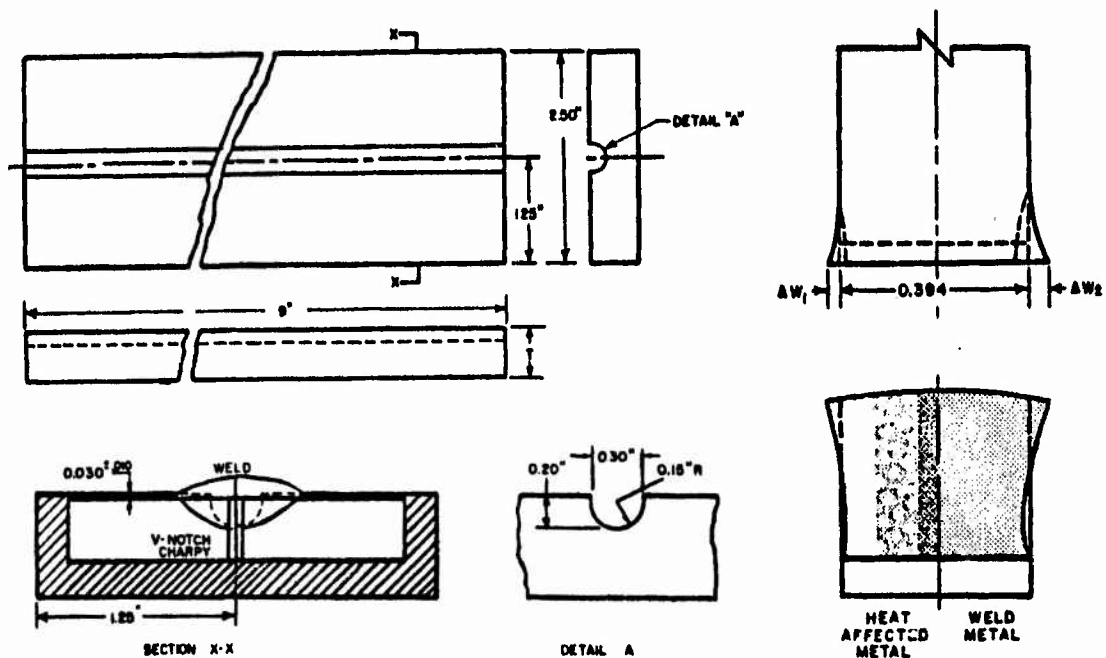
COMPOSITE CHARPY IMPACT TEST - illustration shows the test plate, orientation of test specimen, and lateral expansion in a fractured test specimen.
